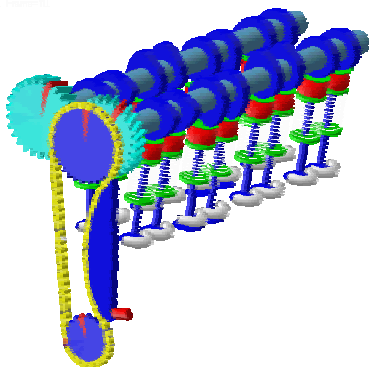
ADAMS/Engine model with timing chain, gear drive and valve train
